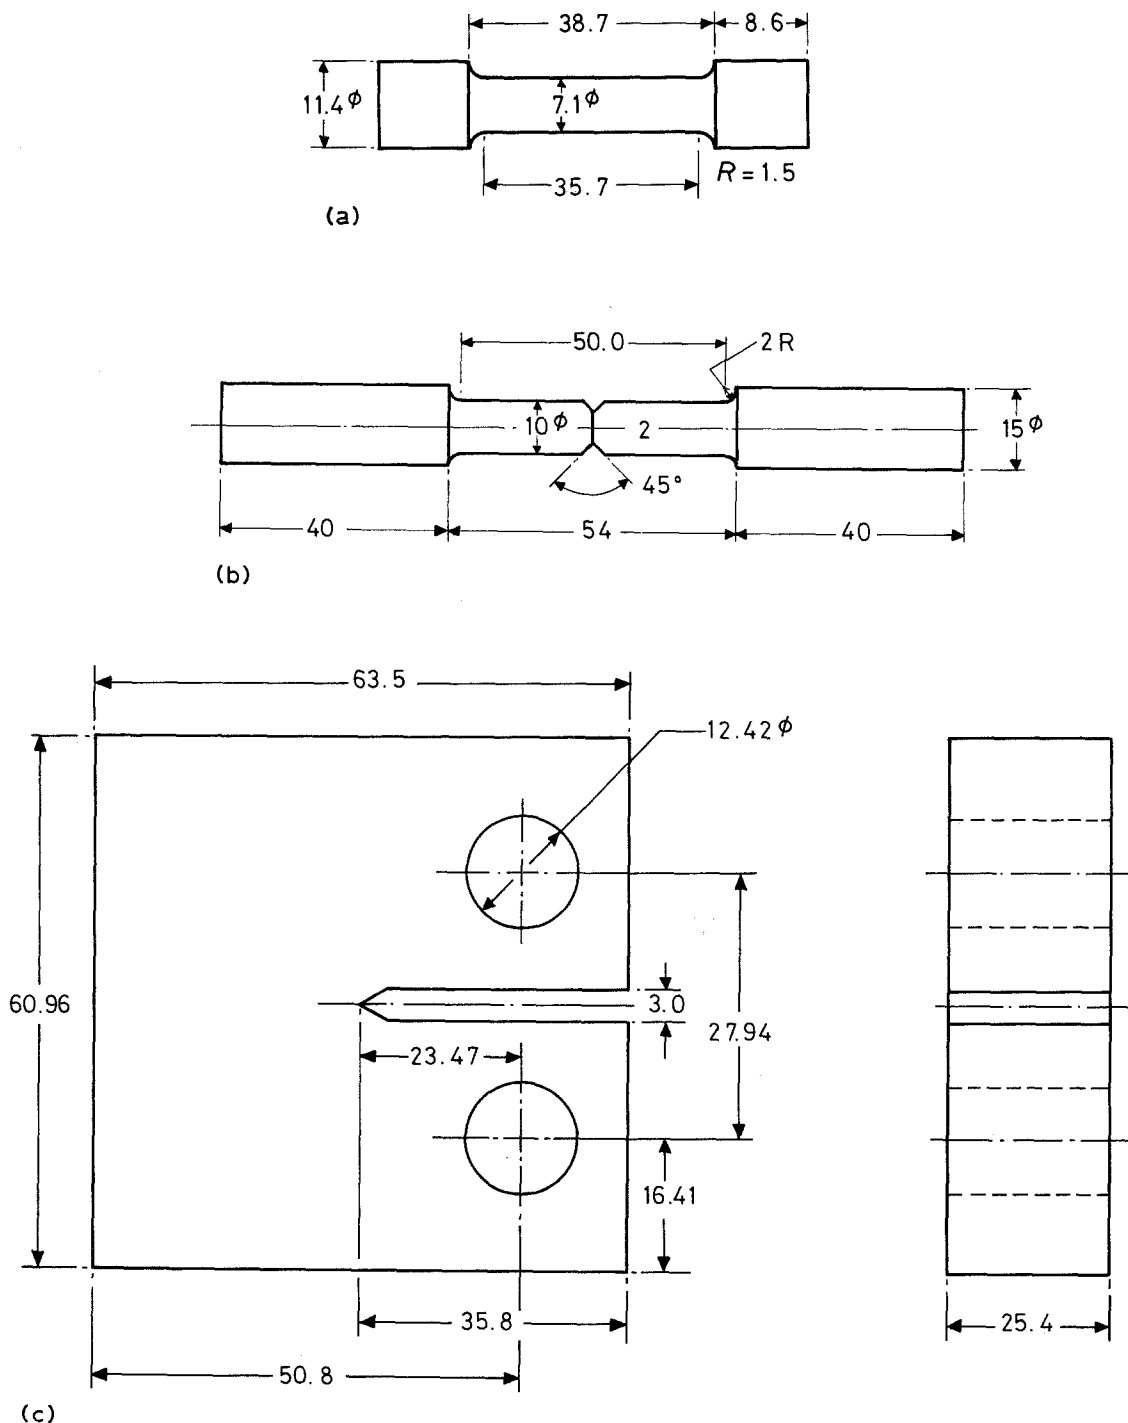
Specimen geometry: (a) Hounsfield specimen, (b) notch tensile specimen and (c) compact tension specimen.
